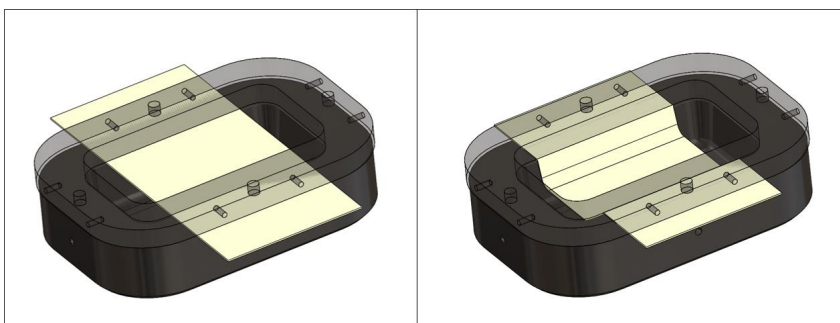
Test specimen before and after friction measurement. The specimen sheet is positioned between the female mould and the rim tool (transparent in the illustration). The male mould is not visible in the illustration.
